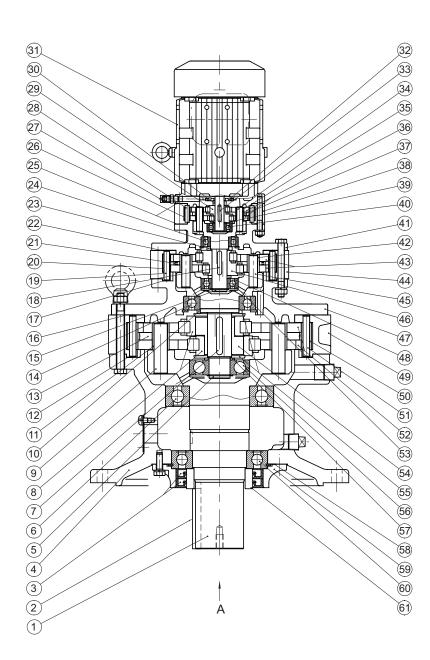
Type CVVM (Vertical, Gearmotor), Triple Reduction (Example: Frame size 6185TD)
